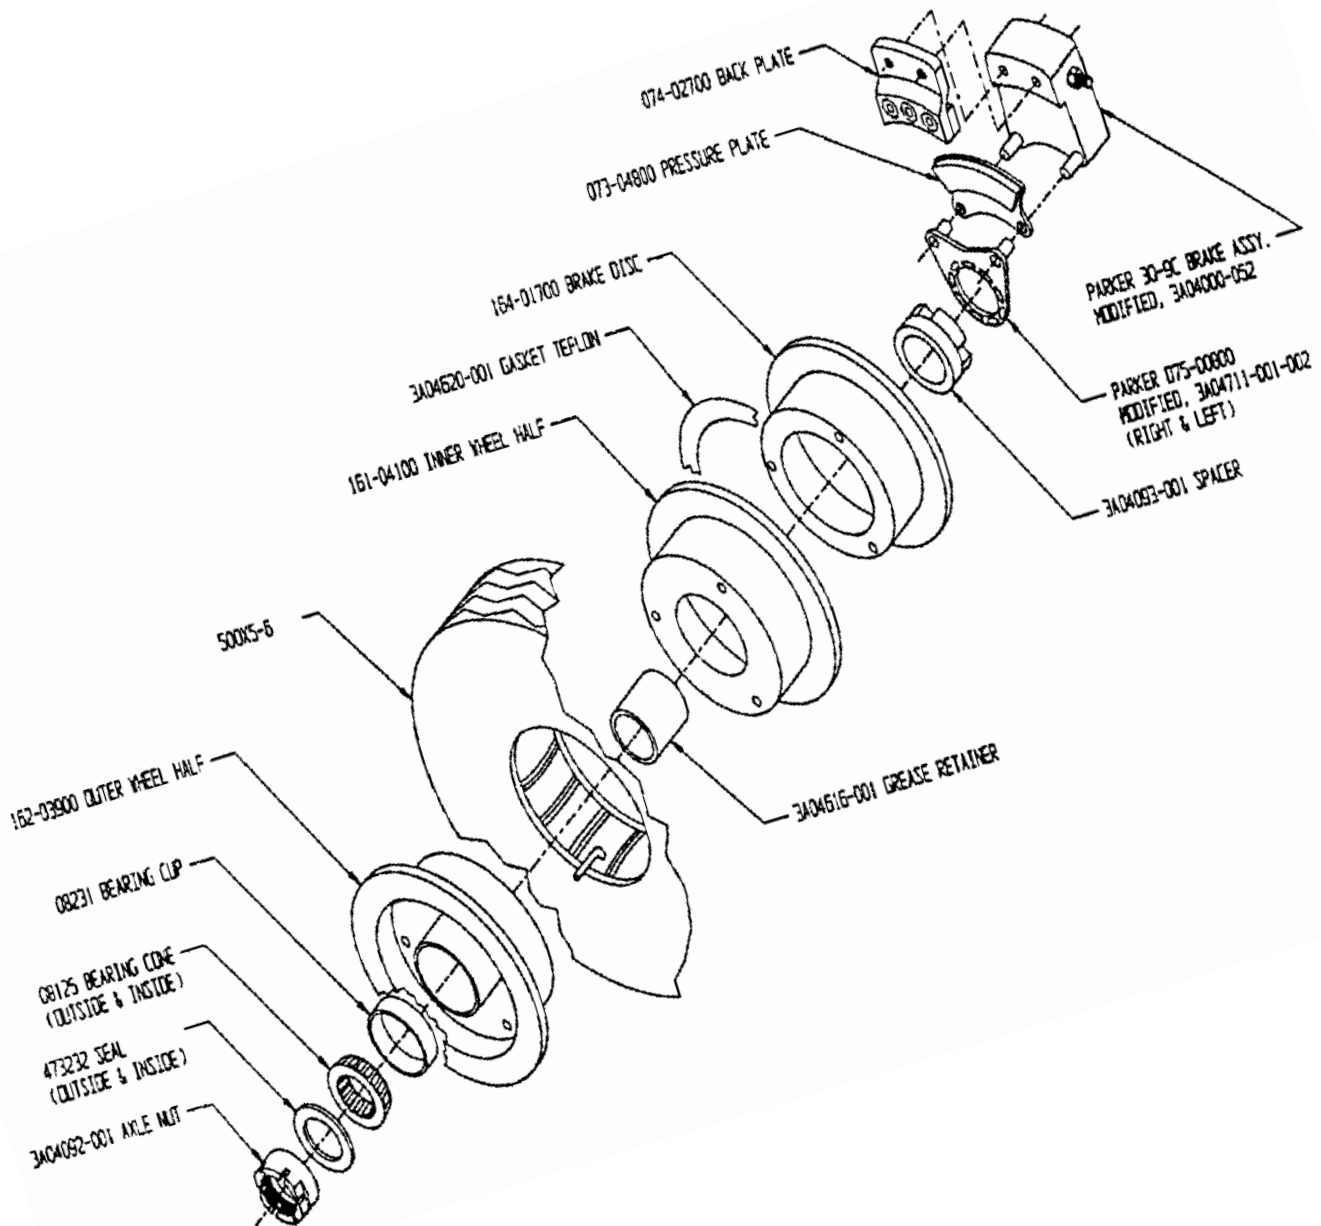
ASSEMBLY MAIN WHEEL AND BRAKE
